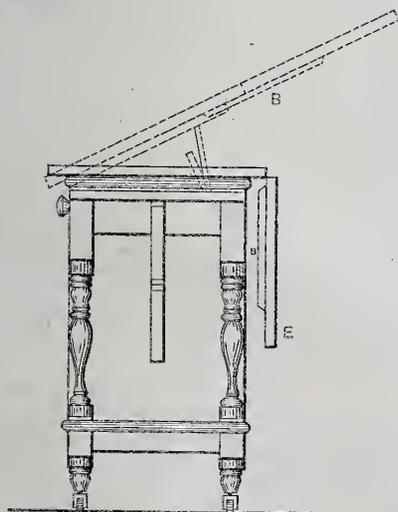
Side Elevation, showing Position of Top when Elevated.
